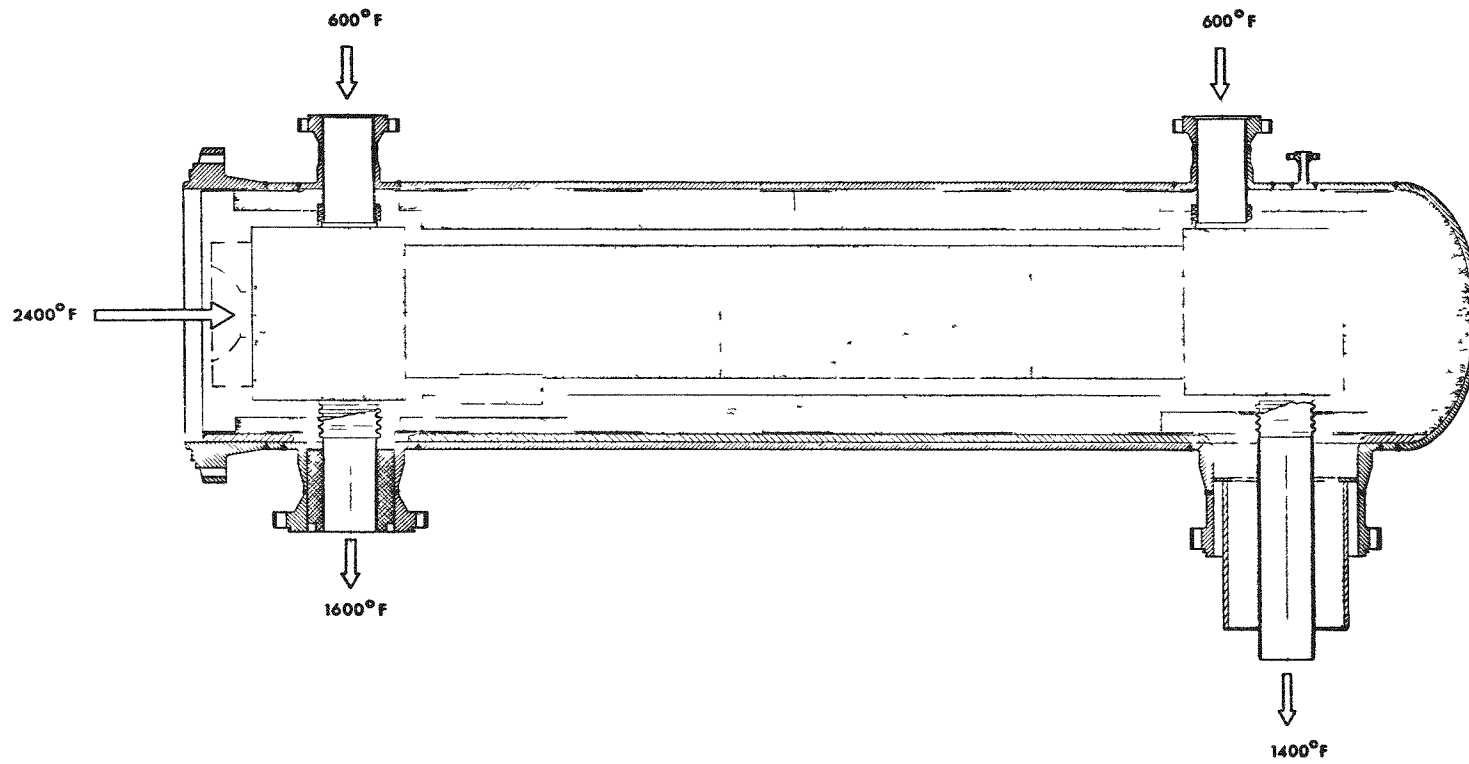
Recuperator assembled in pressure vessel
